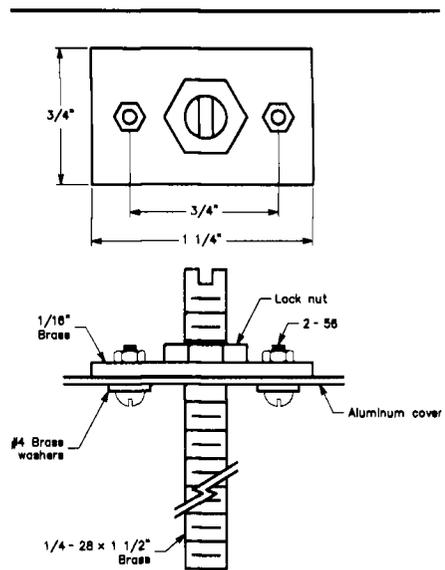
Detail of the adjustment assemblies. Polish the interface surfaces between the cover and the brass plate.
